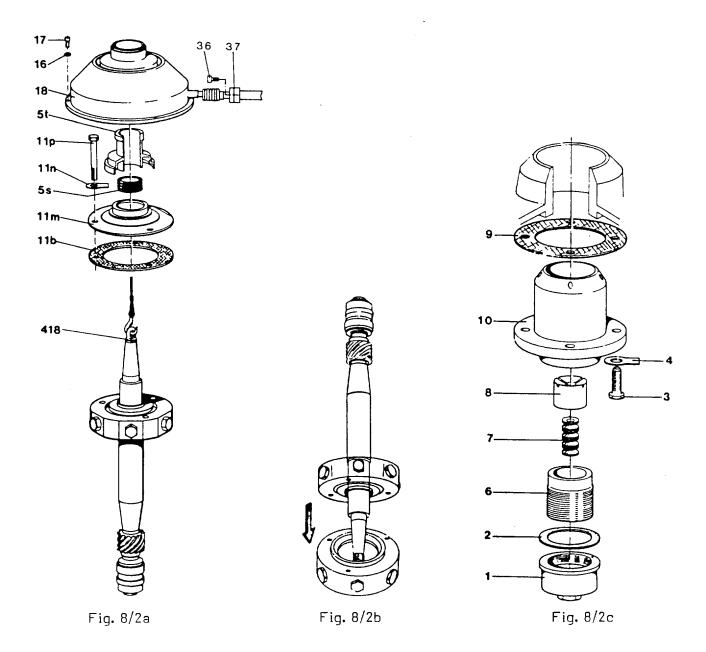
/2a: Undo screws 17 and 36 and remove operating-water feeding device 18 and spindle cap 5t. Straighten safety washers 1ln and unscrew hex head screws 1lp from the neck bearing. Take off protection cap 1lm and spindle spring 5s.
